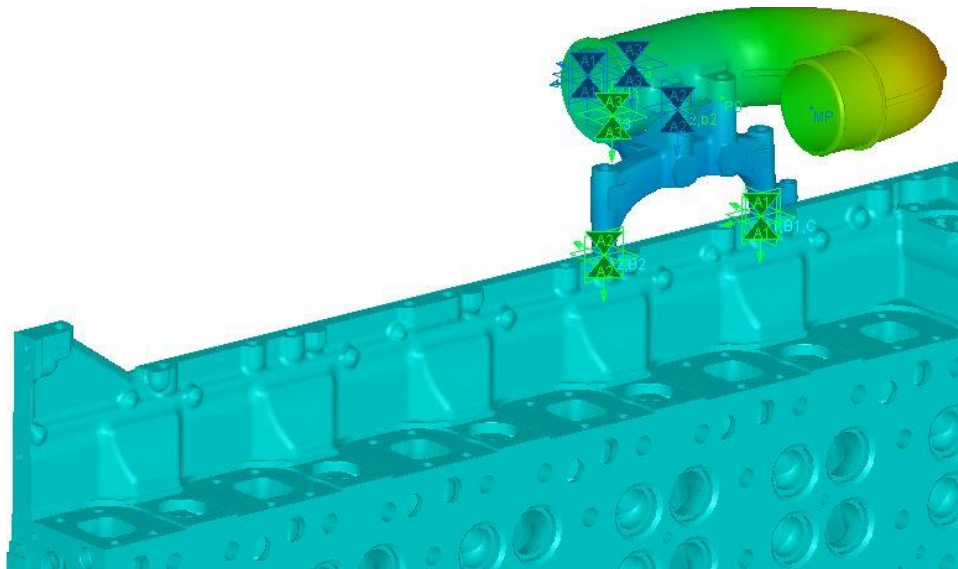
3-2-1 Locating scheme to lock bracket in cylinder head.
